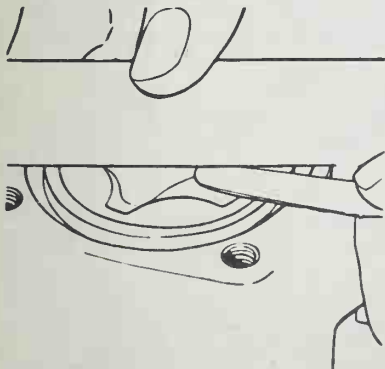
Place a straightedge on oil pump housing and measure between rotor faces and housing. Gap must not exceed 0.25 mm.
